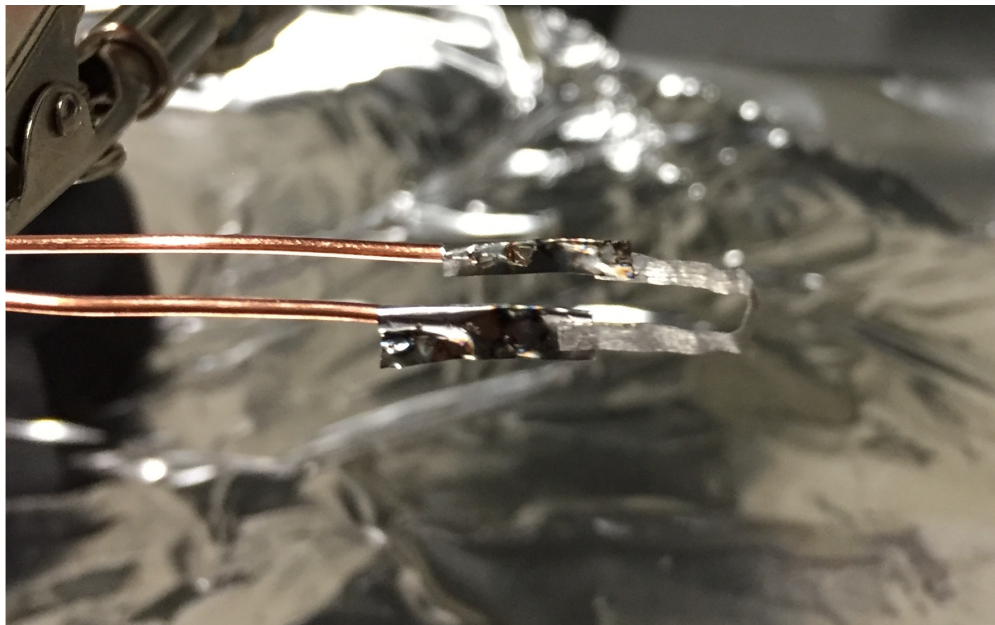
Platinum spot-welded to constantan foil and copper wires.
